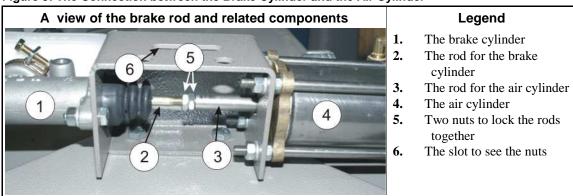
The Connection between the Brake Cylinder and the Air Cylinder
